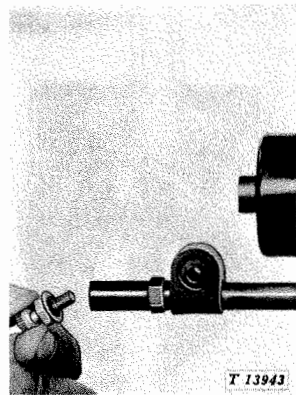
Removing Low Idle Adjusting Screw
